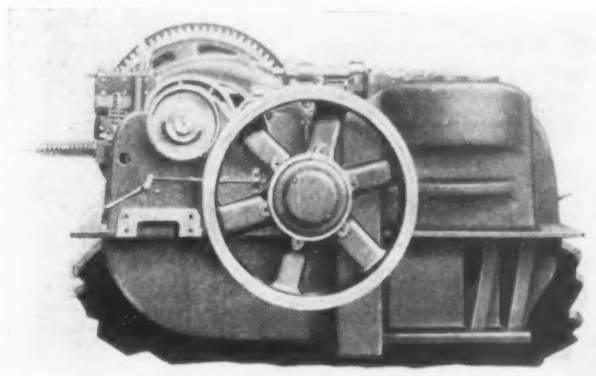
High-Duty Forging Machine, Flywheel Side. Compactness is made possible by the adoption of an over-arm type heading slide
